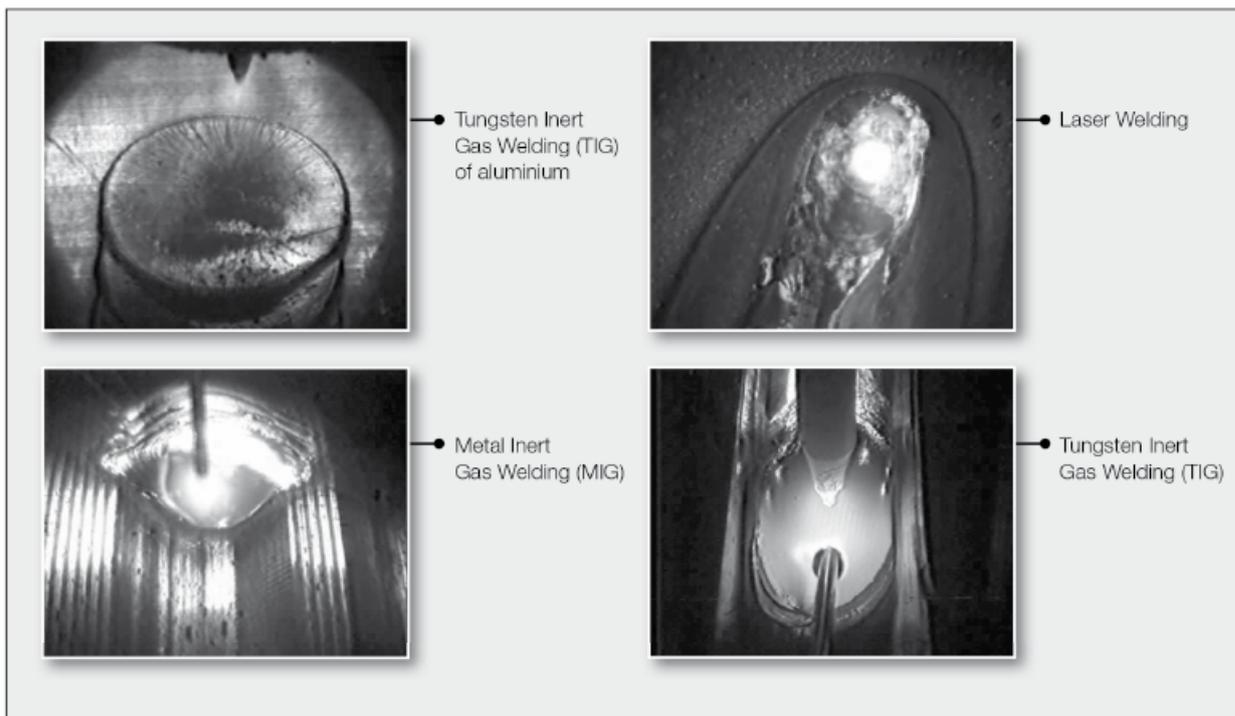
Still images of different welding processes. For videos see www.sukhamburg.com/products/arc-welding-monitor.html
